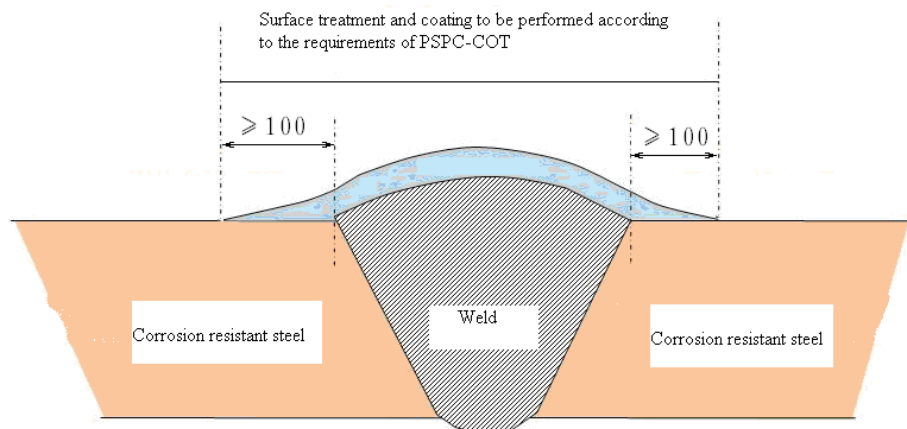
(2) Welding between different corrosion resistant steels
